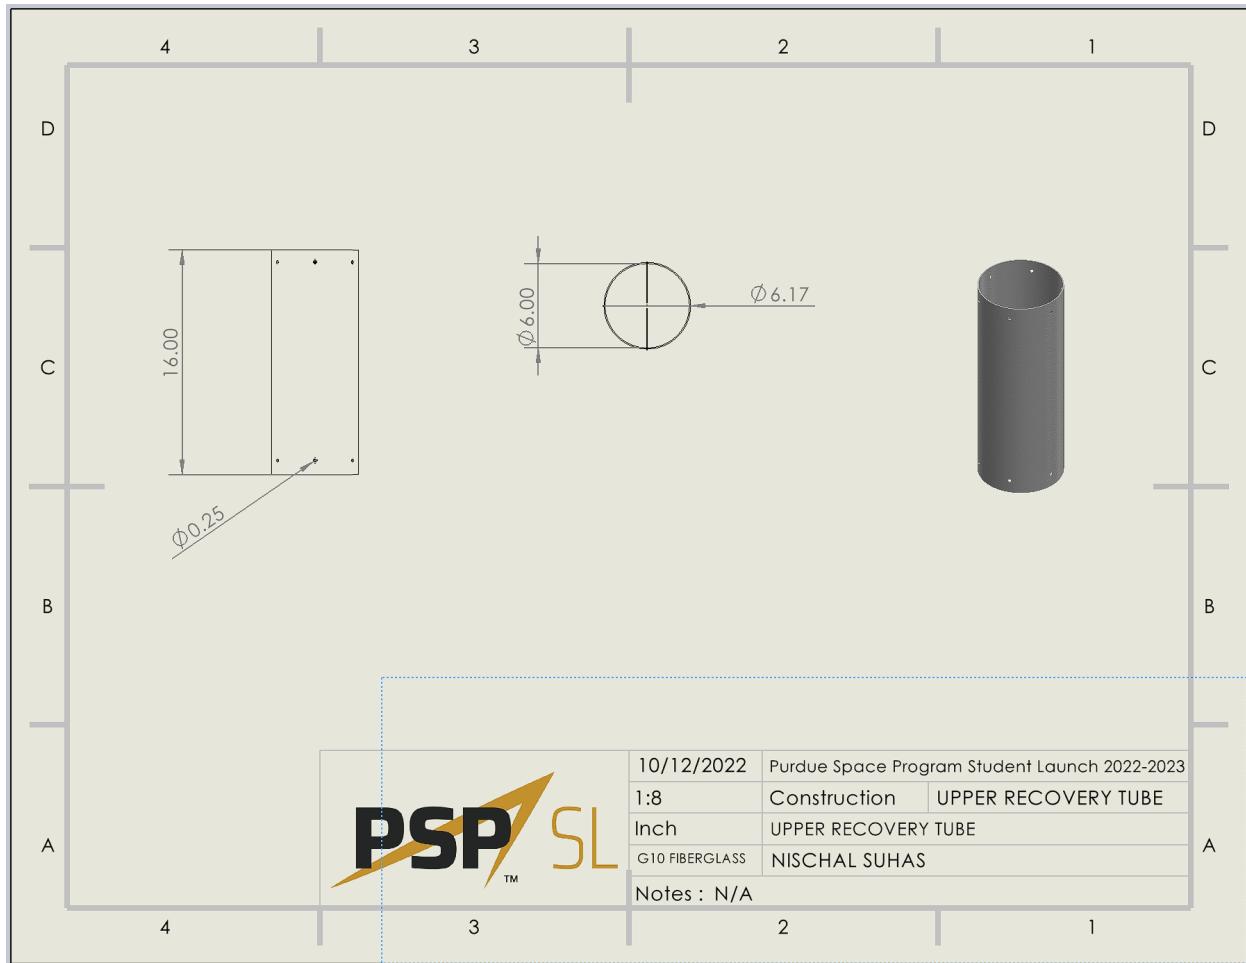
Technical Drawing for Upper Recovery Tube
